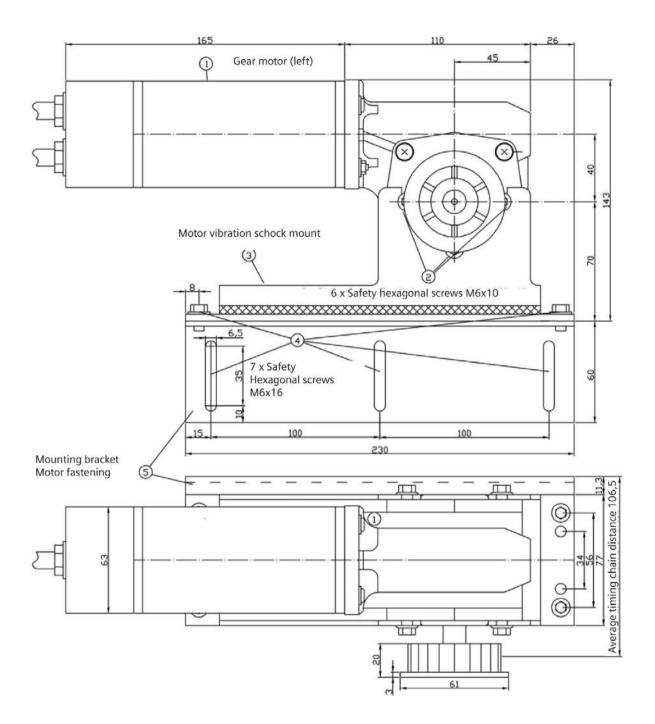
Geared motor with rubber-metal anti-vibration mount and mounting bracket (M4 motor)
